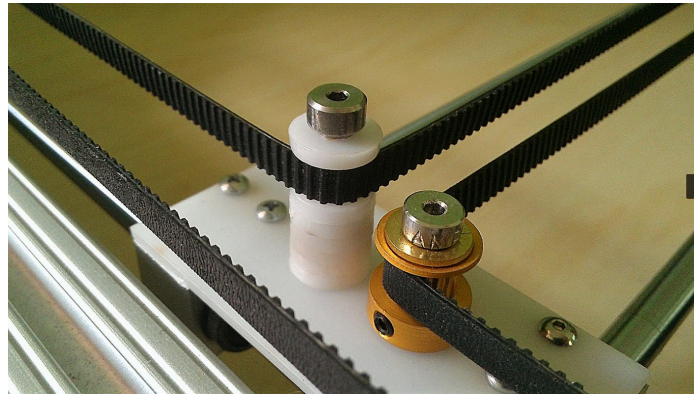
Belt and Pulley Assembly used for 3D Printing Applications (Siber, 2019)
